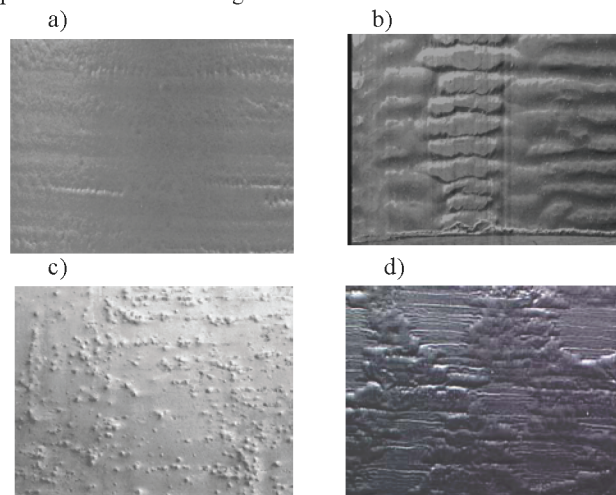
Typical surfaces observed on the range of VDC cast billet samples examined. a) smooth to slight lapping; b) cold folding + lapping; c) "sand paper"; d) "blebbing".
